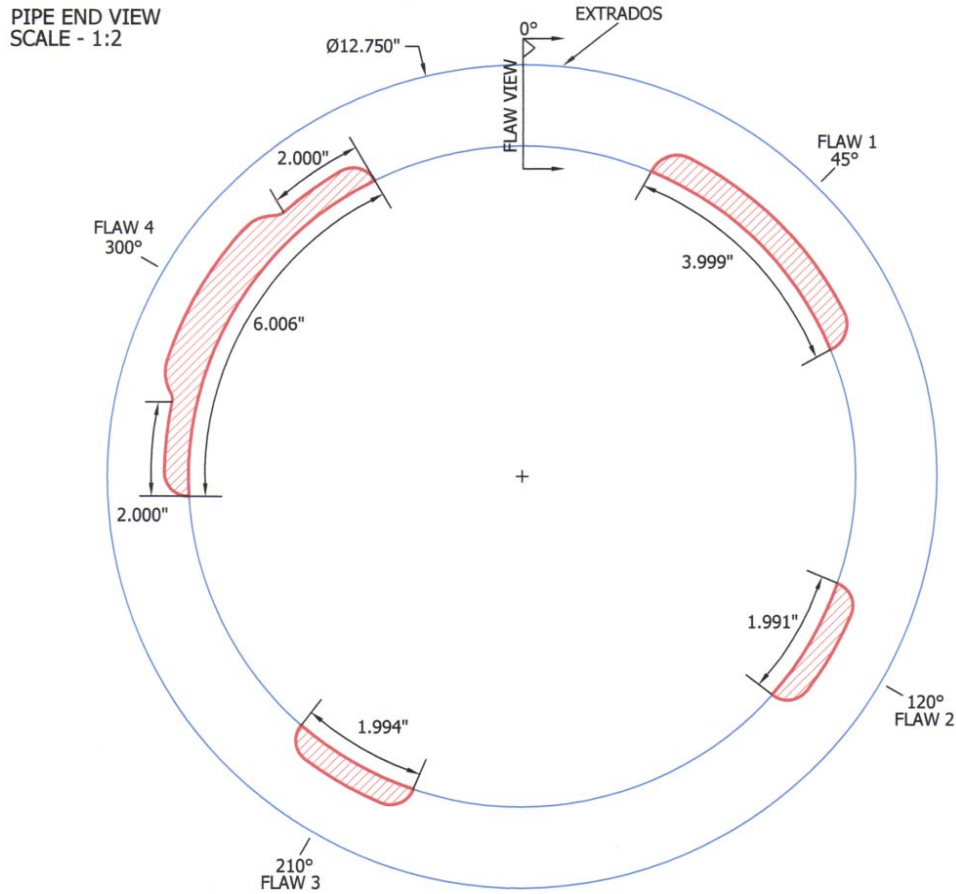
End View Illustration of All Four Thermal Fatigue Cracks Implanted into PZR CASS Specimen 7C-059 (courtesy of FlawTech, Inc.)
